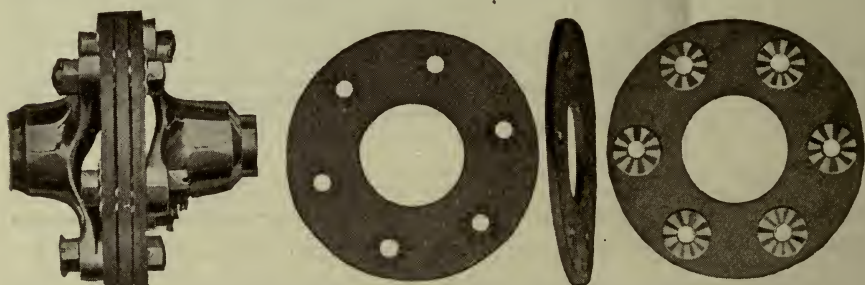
Thermoid Hardy Fabric Universal in Detail and Assembly.
